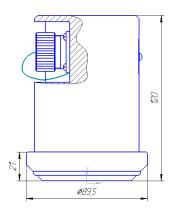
TP-140D(M) Transducer Pressure adjusted dimensions
